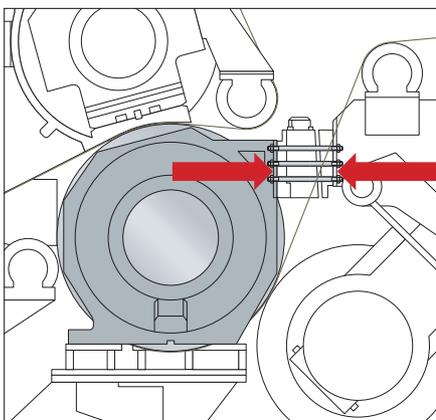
Bearing housing as part of the machine frame. Intermediate piece tightened with large bolts (and high preload force).
